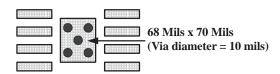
DGN PowerPAD PCB Etch and Via Pattern
